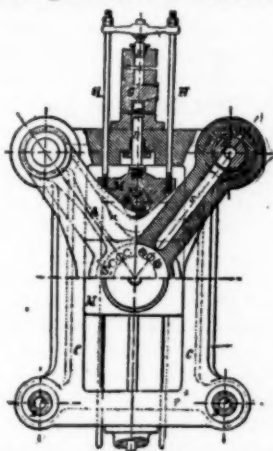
DETAILS OF THE BOULET APPARATUS—PLAN.
